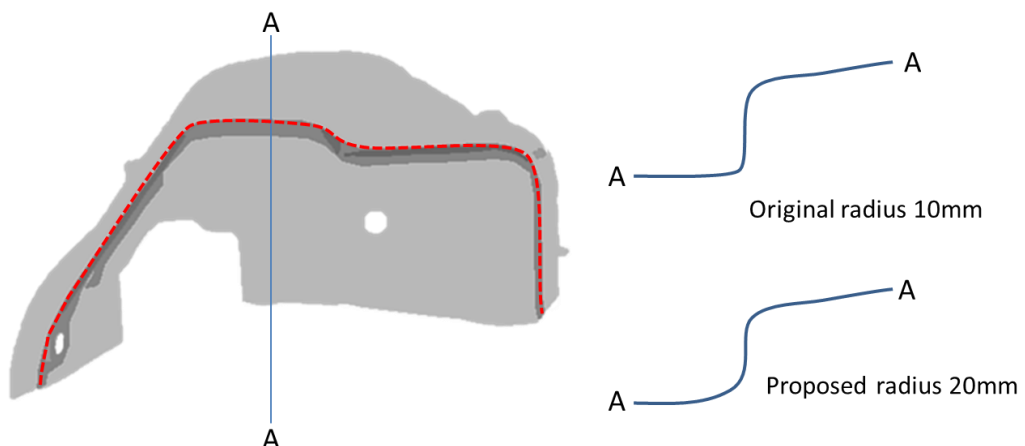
Opening the radius reduced the requirement for draw beads from a double bead to a single bead.
